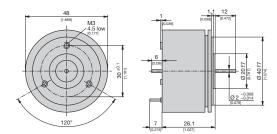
KINAX 3W2 with special drive shaft at front and at rear. At front: Ø 2 mm [0.078"], length 12 mm [0.472"]. At rear: Ø 2 mm [0.078"], length 6 mm [0.236"].
